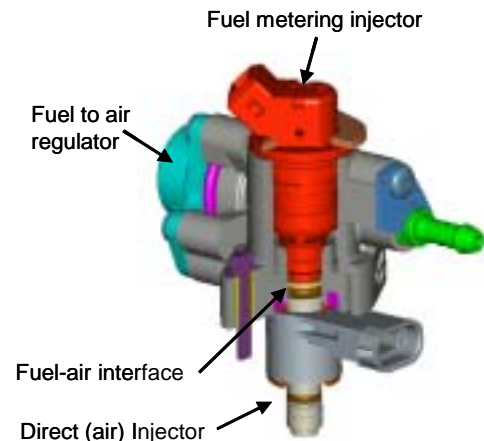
2-stroke 50cc motorcycle production fuel rail assembly
